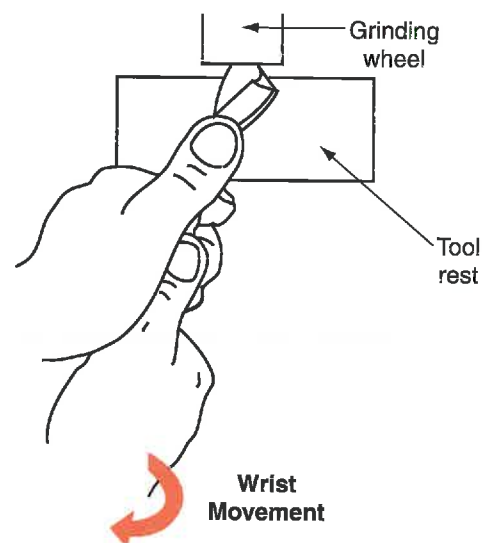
B. Maintain grinder contact across the entire cutting edge. When finished, rotate the drill  $180^{\circ}$  and grind the other cutting lip. The cutting lips, point angles, and clearances must be the same. See Figure 25-59C.
